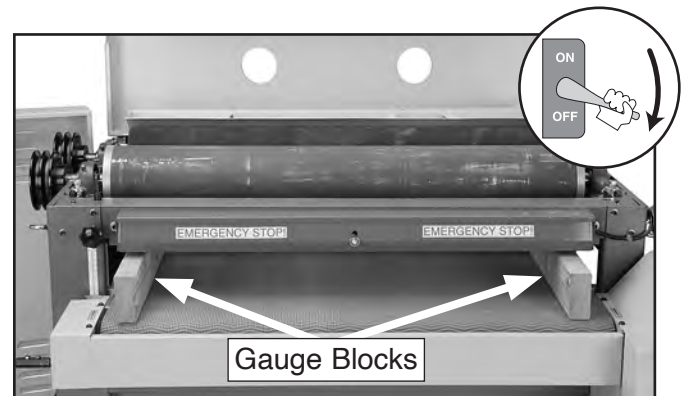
Example of gauge blocks in position for adjusting pressure roller height.
